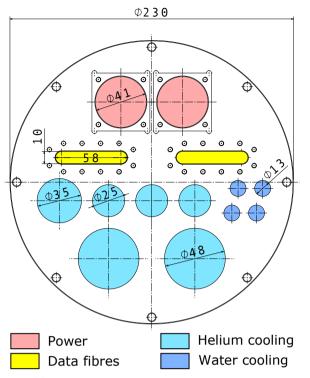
Drawing of the cabling flange. Additional ports will be added for auxiliary use. Dimensions in $\rm{mm}.$
